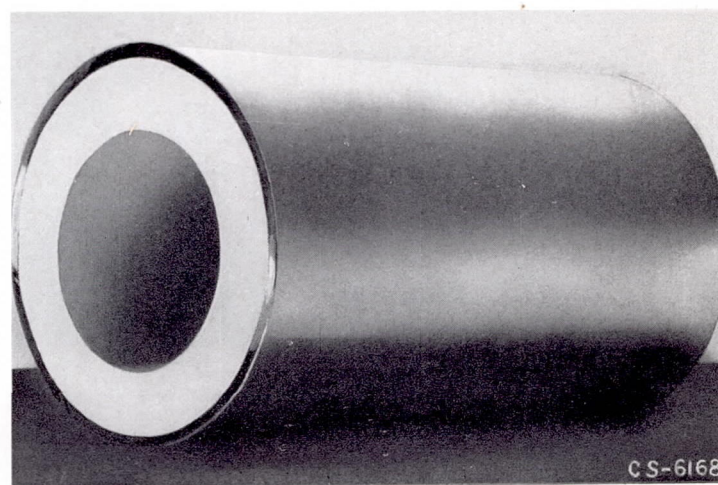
Photograph of metal-sprayed ceramic test cylinder machined and ready for thermal shock test (from ref. 16).
